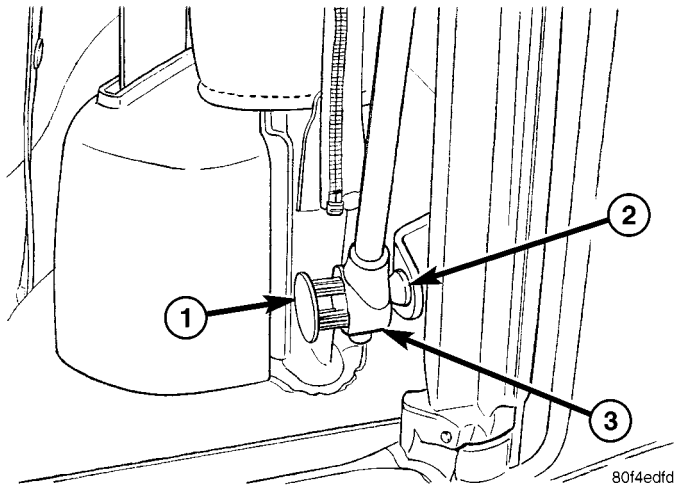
SUPPORT ROD CYLINDER CONNECTION
